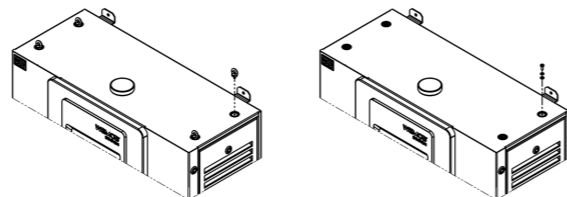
View of the replacement of one lifting eye with a bolt, washer and O-ring
